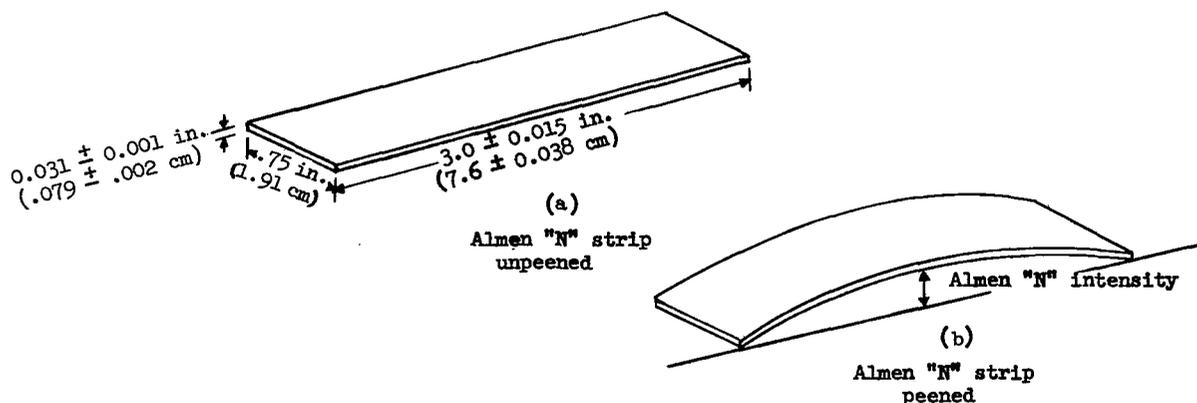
Dimensions and schematic of Almen "N" AISI 1070 steel test strips.
